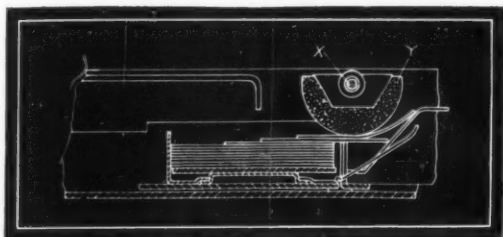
Card picker employs sponge rubber thumb which moves card by friction
